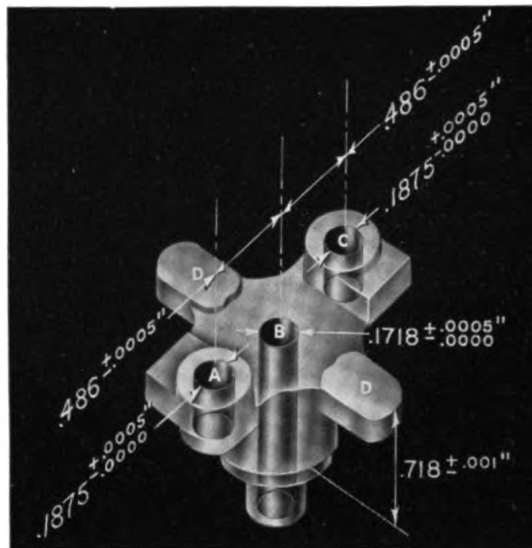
An aluminum stud production Jig Bored to close tolerances.
